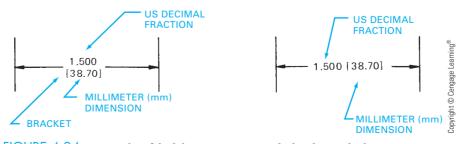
Examples of dual dimensioning using the bracket method.
